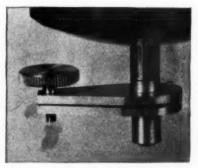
Spindle lifter for high precision work. aligning flat spindle tip, Fig. 10, makes easier the measurement of rounded parts.
